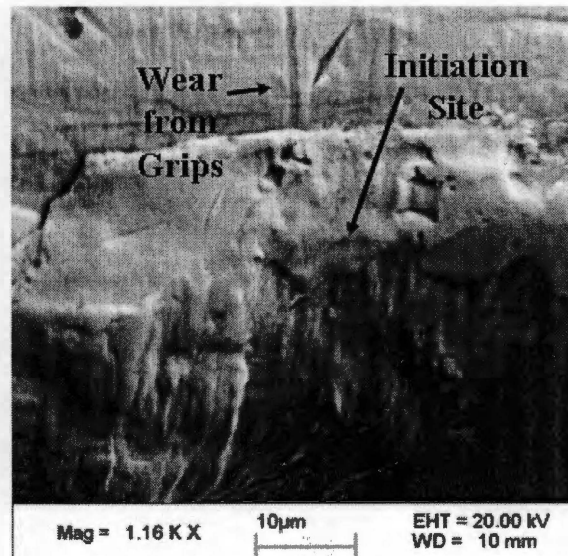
SE Image of the Side of a Fractured Fatigue Specimen, Tested in Vacuum. The Fracture Surface Would Be Perpendicular and at the Bottom of This Image. The Crack Initiation Site Is Labeled, and Wear from the Gripping Section Is Visible.
